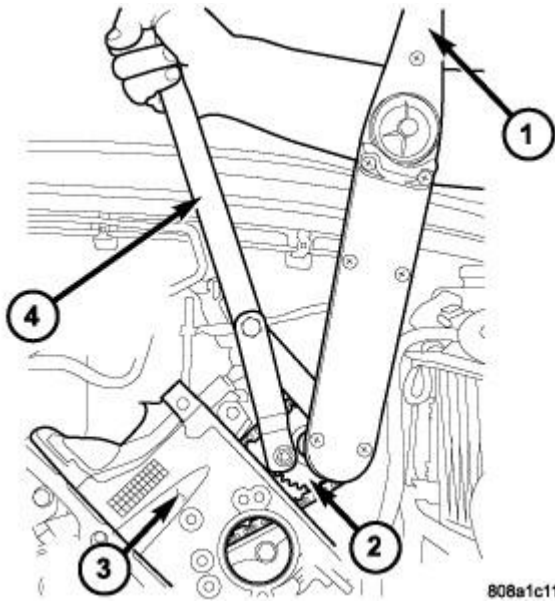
Tightening Left Side Cam Sprocket Retaining Bolt
